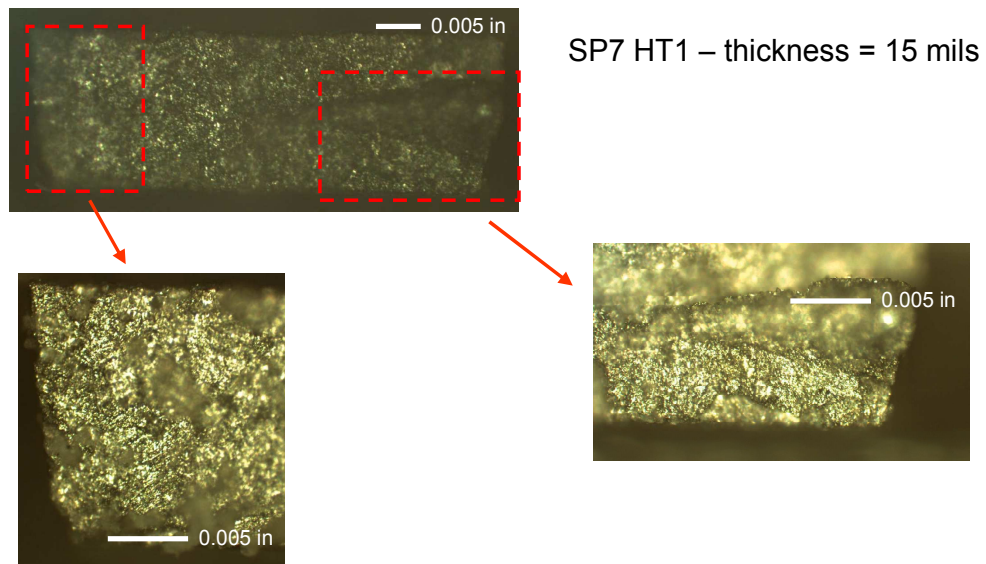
Optical fractography for fatigue test specimen SP7 HT#1.
